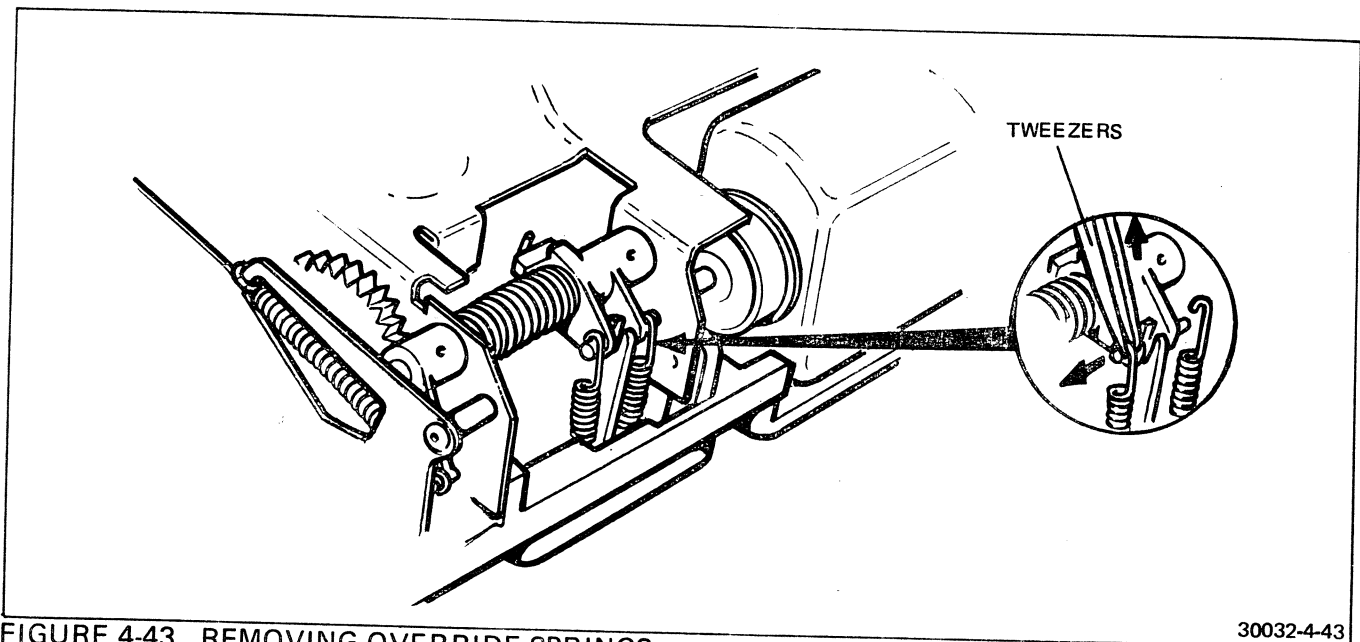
REMOVING OVERRIDE SPRINGS
